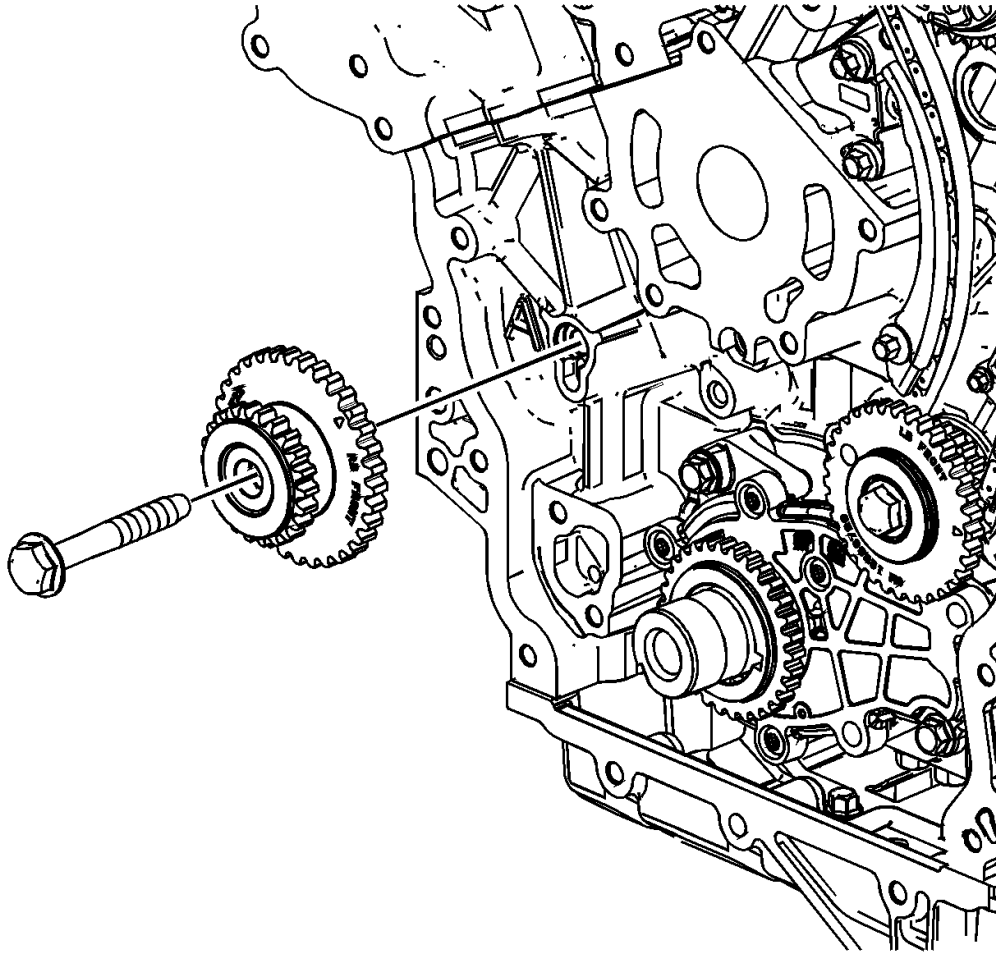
Identifying Camshaft Intermediate Drive Chain Idler & Bolt
